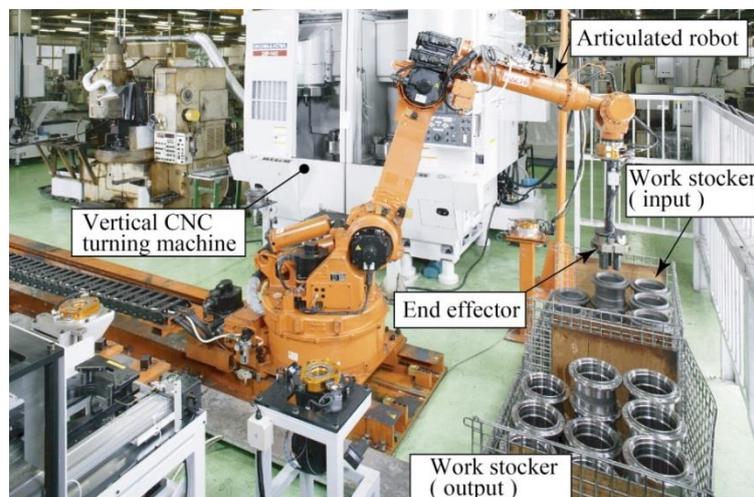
Robot allocated at front of machine tool (by courtesy of Fujikoshi, 2010)
